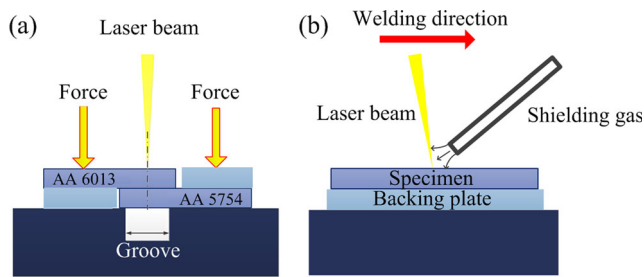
The schematic of the welding process. a Front view. b Side view
